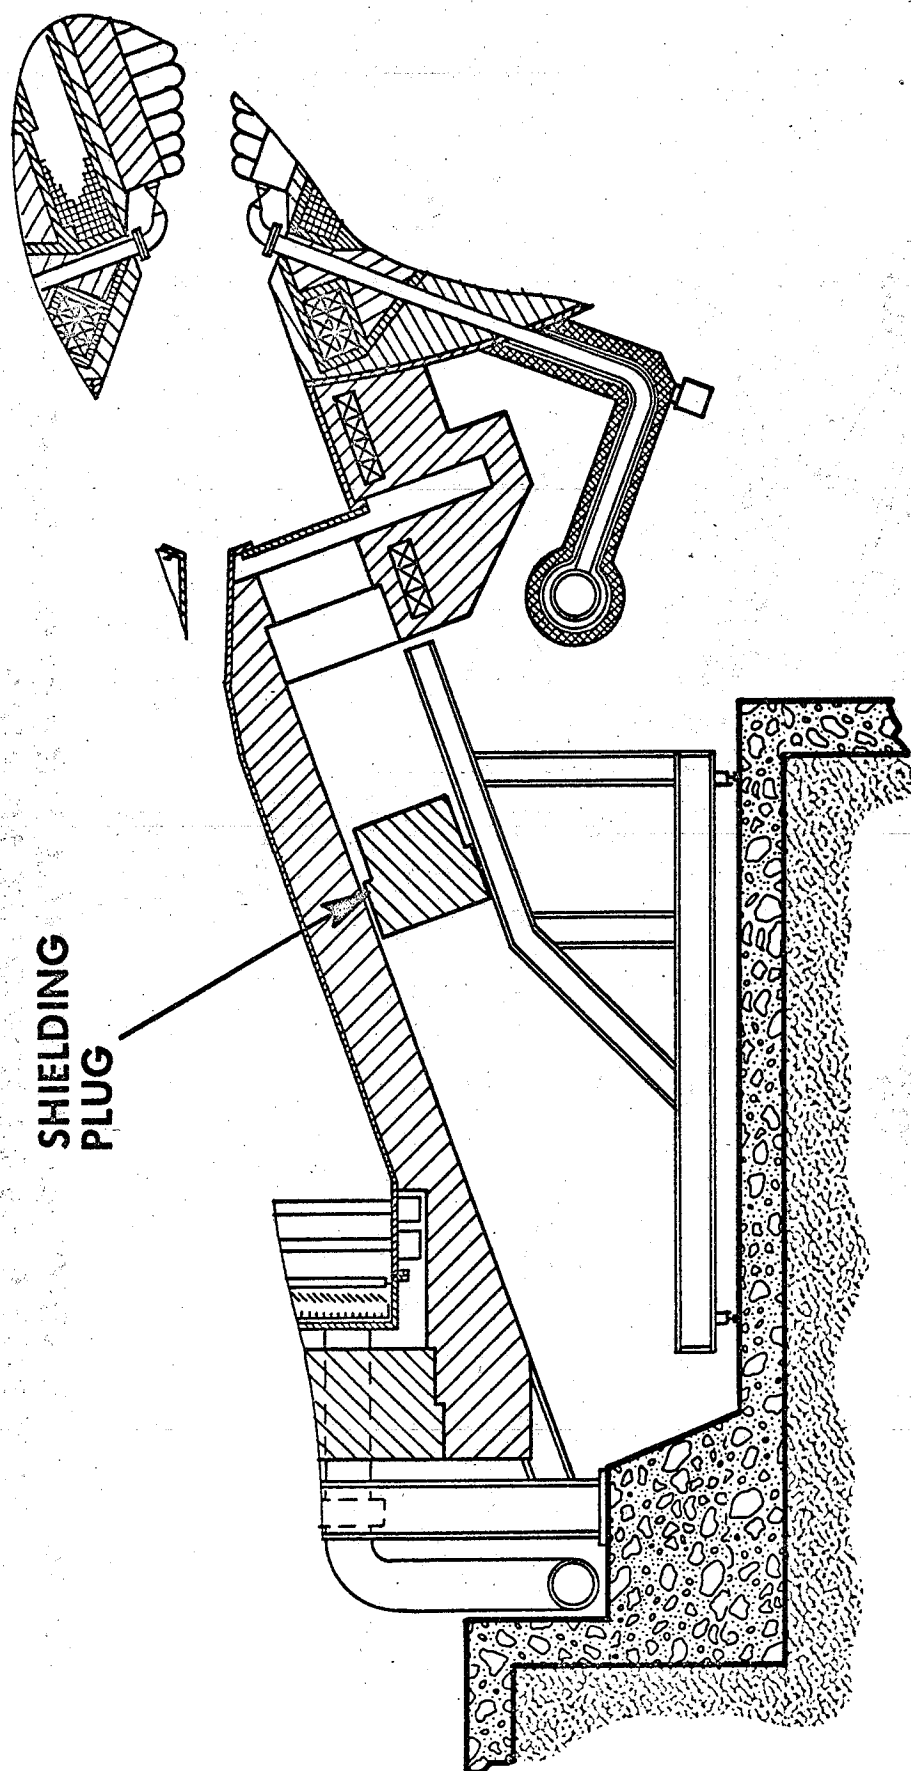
A, MODULE REMOVAL; T SHIELDING PLUG REMOVED
